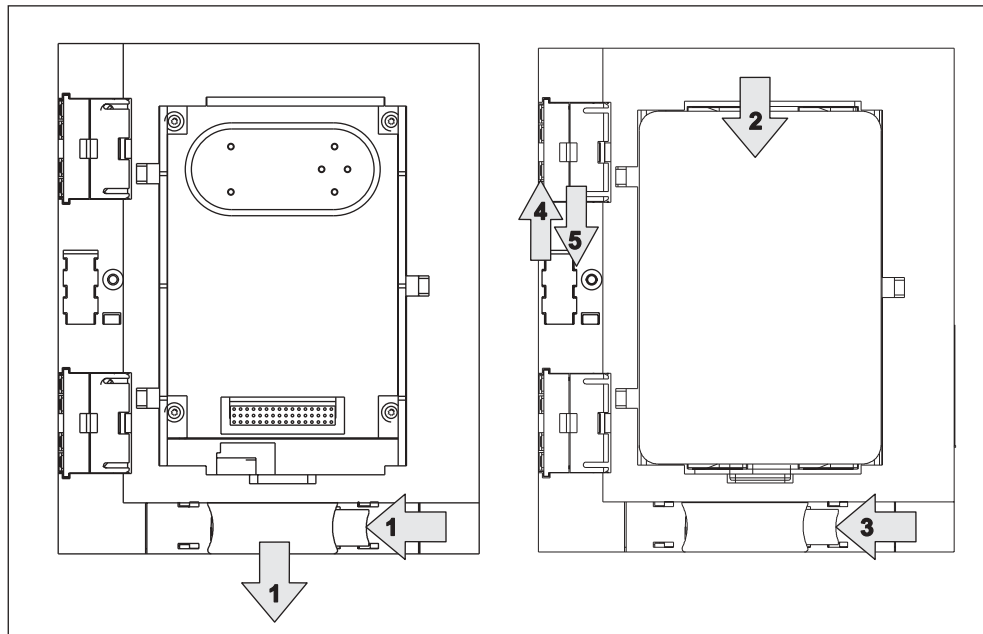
Inserting and Identifying the Power Supply Module PS
